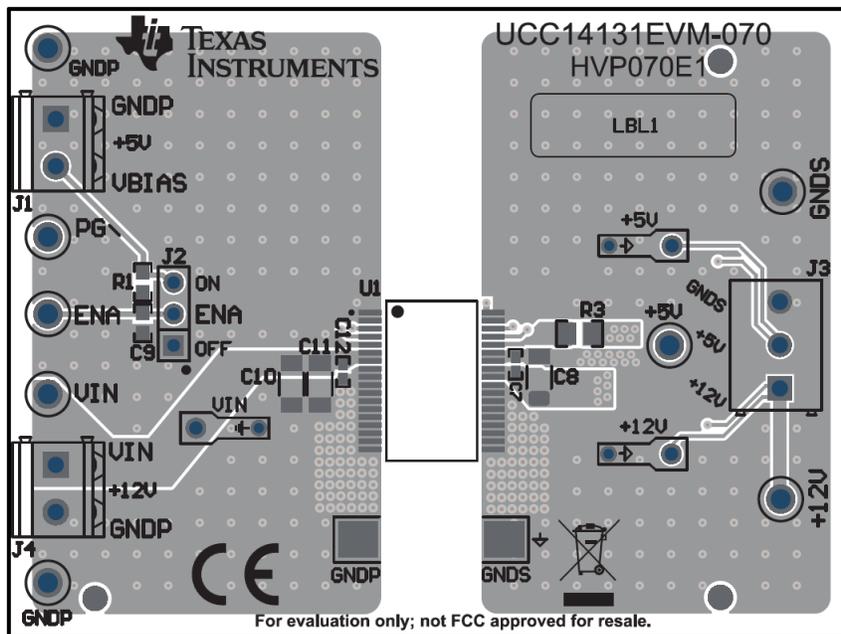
UCC14131EVM-070, PCB Top Layer, Assembly
